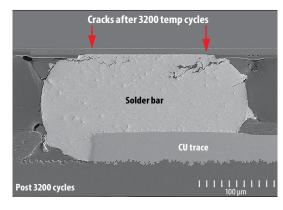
Cross section x-ray of an eGaN IC solder bump showing bump cracking.
